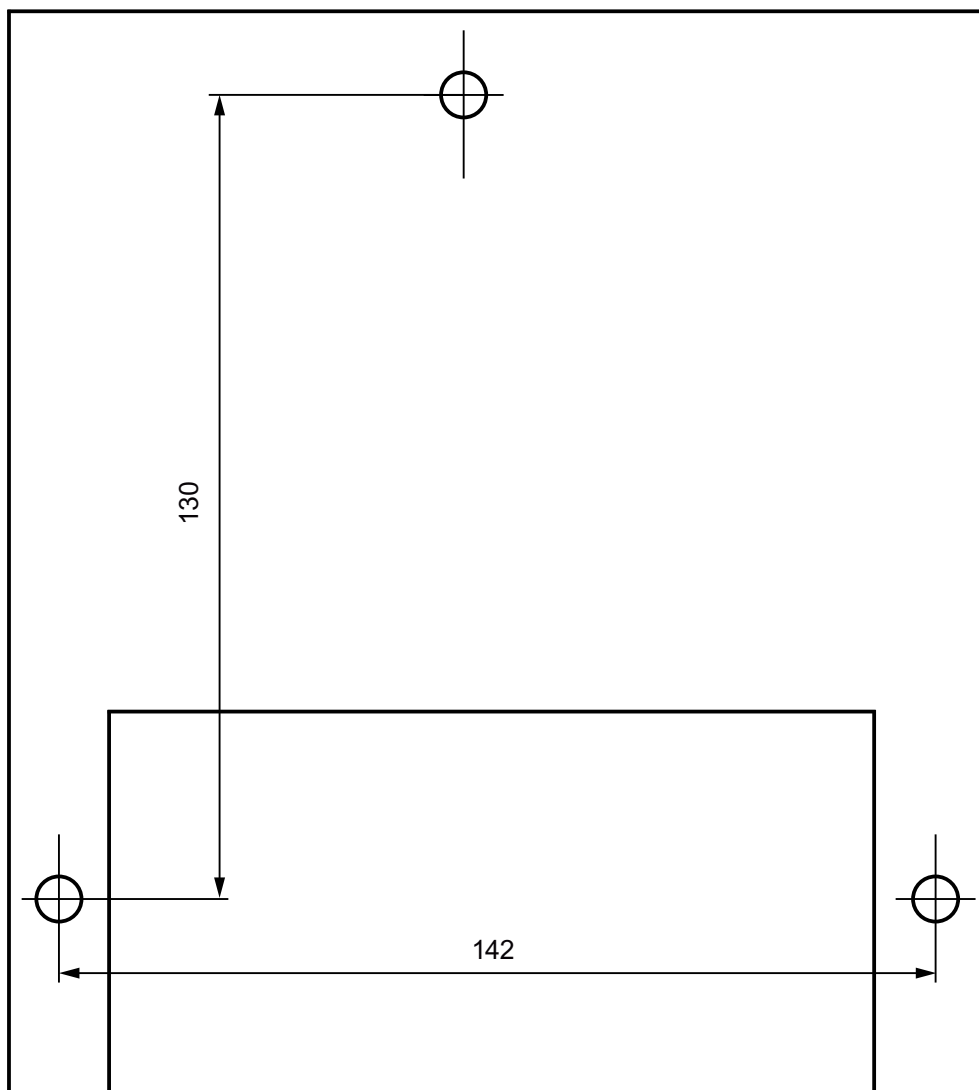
Drilling pattern - All dimensions specified in millimeters.
